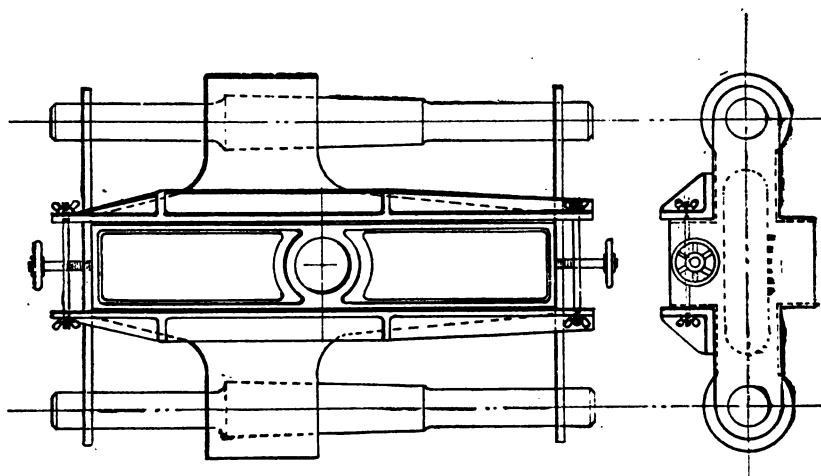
SIDE AND END ELEVATIONS OF JIG FOR BABBITTING CROSSHEADS OF VAUCLAIN COMPOUND LOCOMOTIVES, AVOIDING THE NECESSITY OF MACHINING THE BABBIT BEARING FACES.
